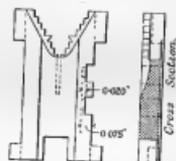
Linotype: two-letter matrix for upper magazines of English machine. Full size.
